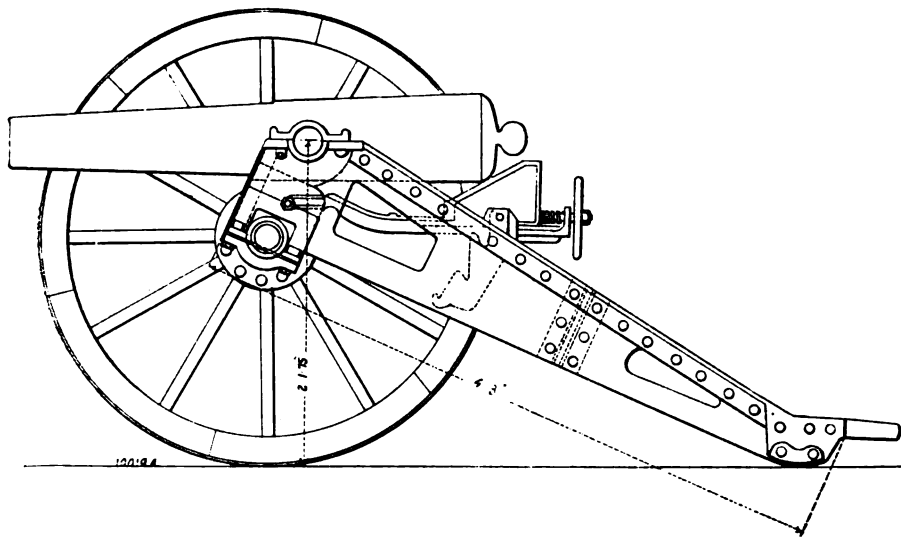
7-POUNDER MOUNTAIN GUN AND CARRIAGE, BRITISH SERVICE PATTERN.
